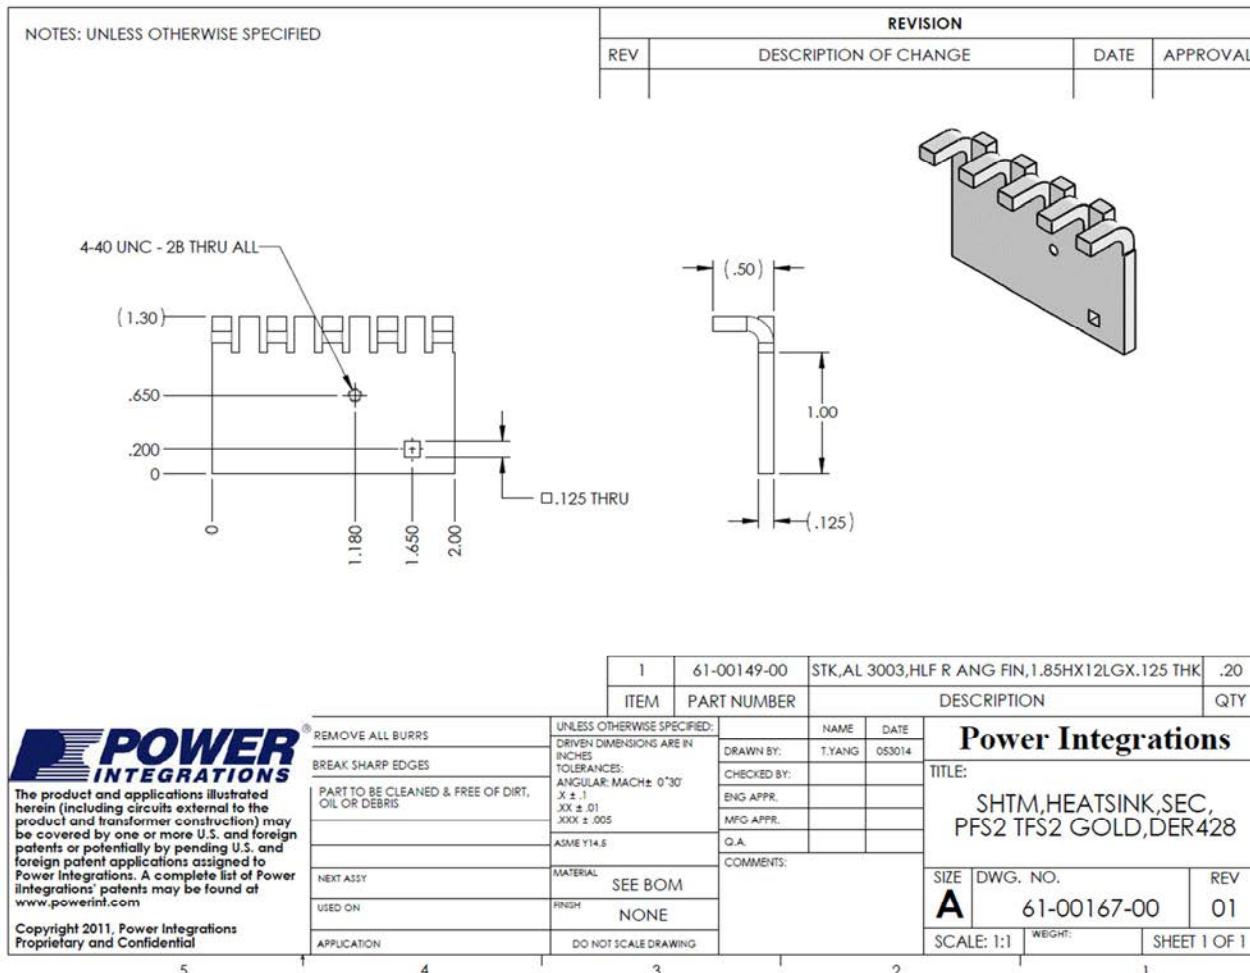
Secondary Heat Sink Sheet Metal Drawing.
